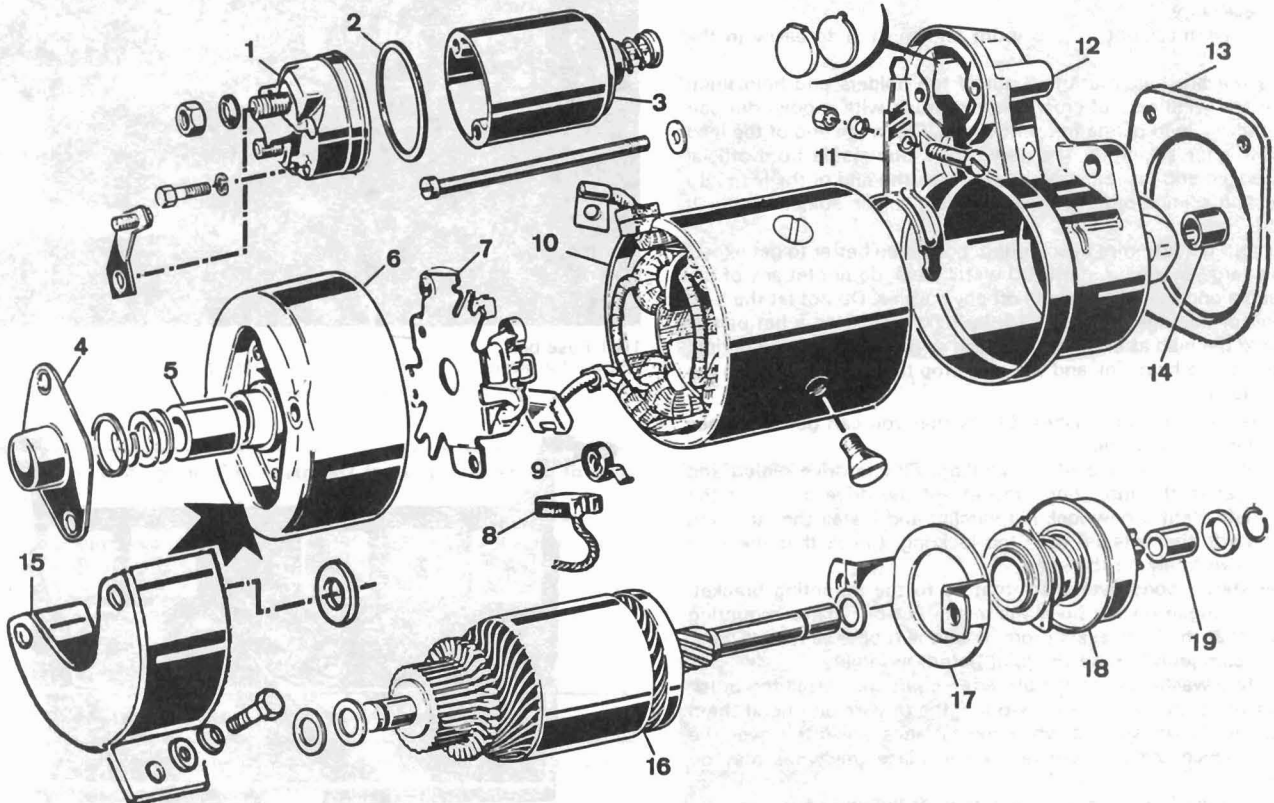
Exploded view of typical starter motor (Sec 9)
